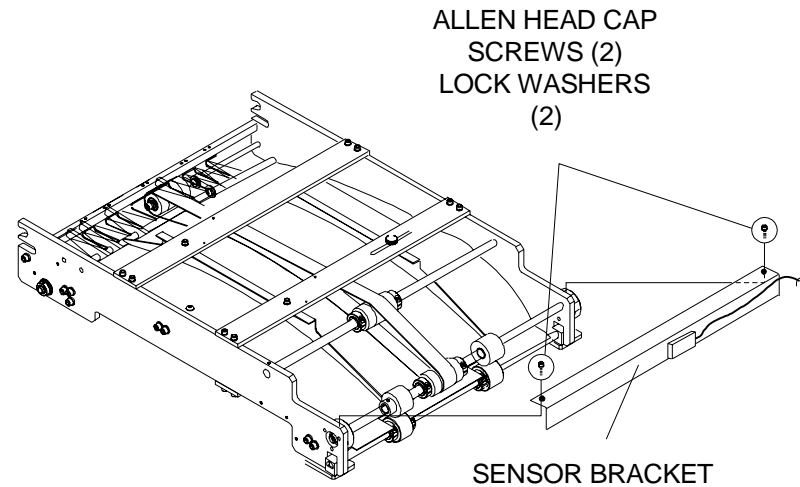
Mounting the Bypass Exit Sensor Bracket Assembly
